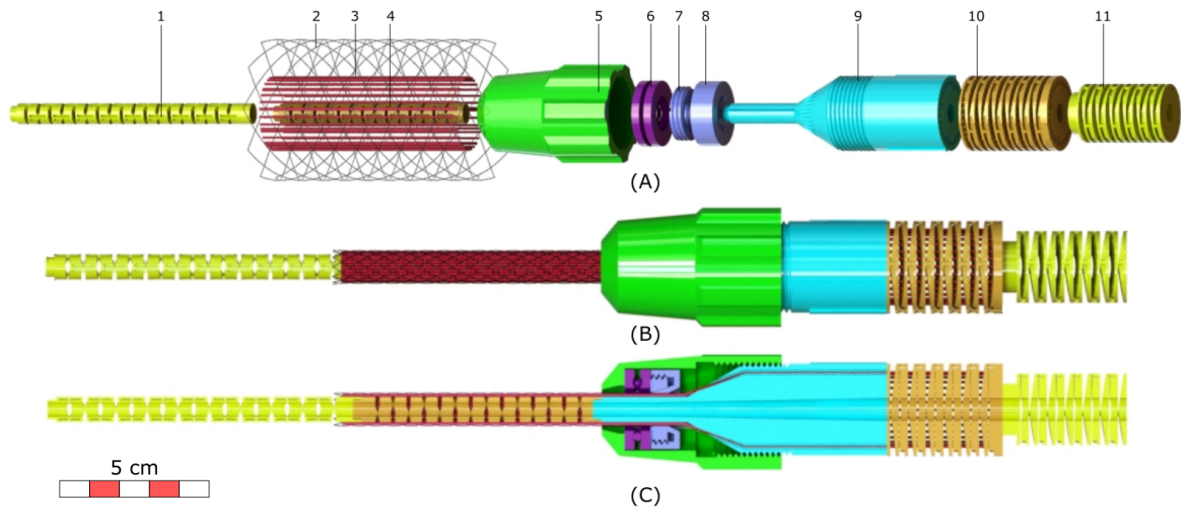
Schematic figure of the AlKingScope, (A) Exploded view of the steerable variable stiffness mechanism, which consists of top steerable segment (1), braided sheath (2), nylon wires (3), variable bending stiffness (VBS) steerable segment (4), stiffening cone (5), thrust bearing (6), fixation of the braided sheath (7) & (8), frame (9), steering segment for the VBS segment (10) and top segment (11). (B) Side view of the total assembly fitted together, indicating dimensions. (C) Cross section of the steerable VBS mechanism.
